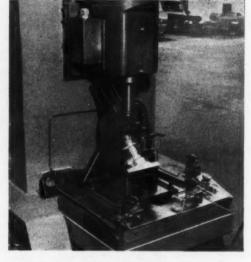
Close-up view of the spindle head and the work-holding fixture on the A.M.T. unit-head drilling machine shown in Fig.1
